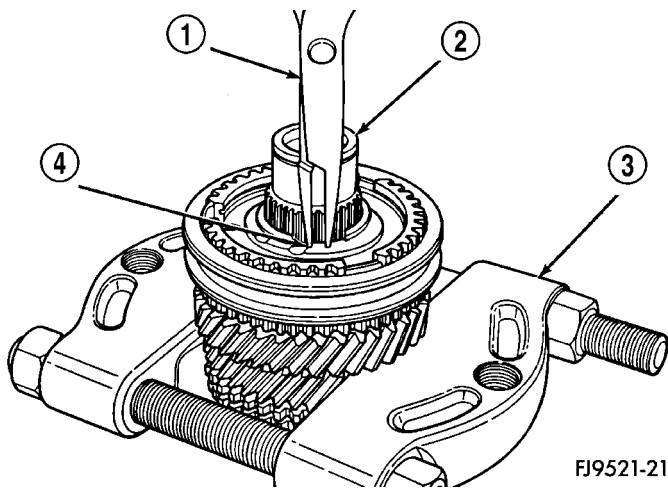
5th Gear Synchronizer Snap Ring Installation
